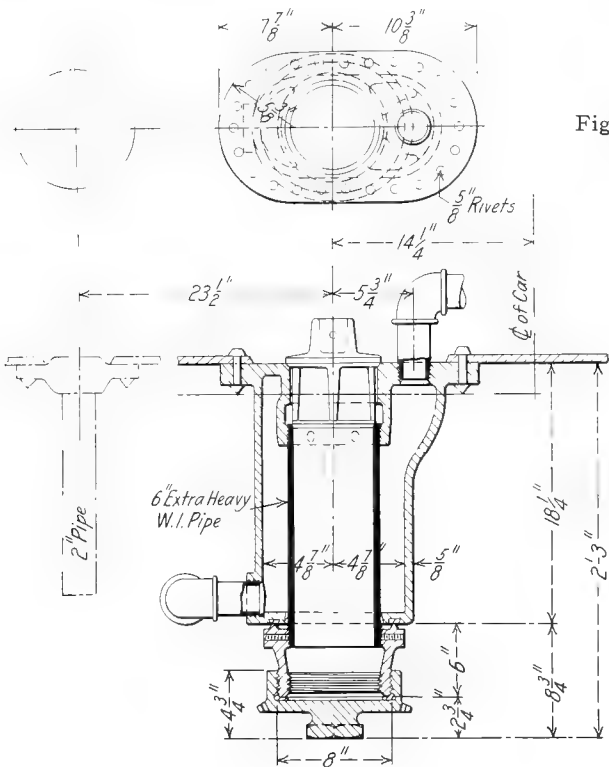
American Car & Foundry Company 6-in. Steam Jacketed Outlet Valve for Tank Cars.
